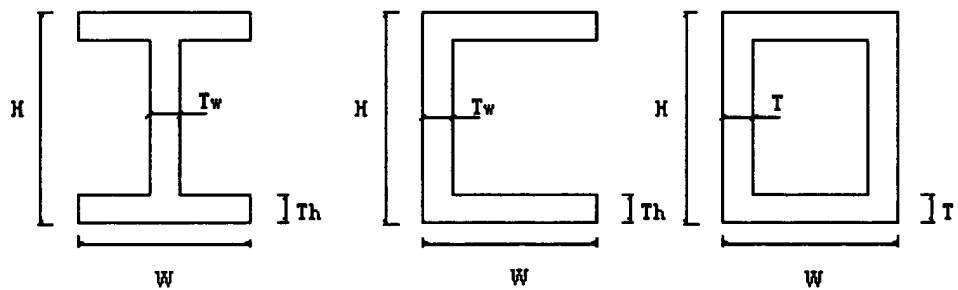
I-Beam, [-Beam and []-Beam used by the collapsible container frame panel structure
